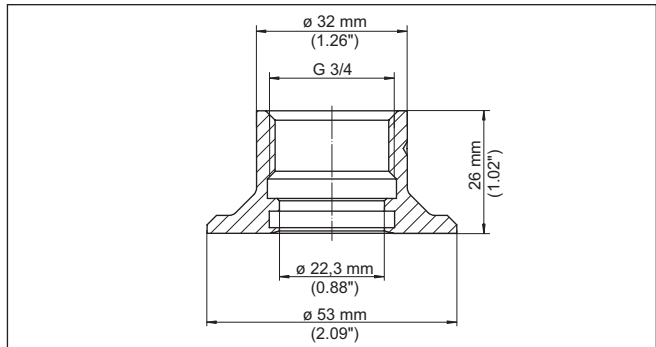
Dimensions of welded socket, G $\frac{3}{4}$ (ISO 228-1)
